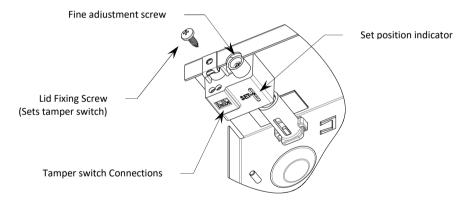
Position of tamper assembly on 'clam shell' style enclosures
